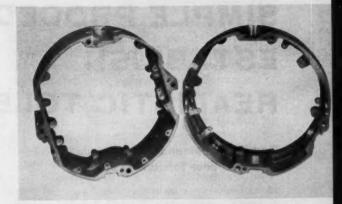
Two magnesium missile castings handled on the tape-controlled jig borer in 60 per cent of the time formerly required.
